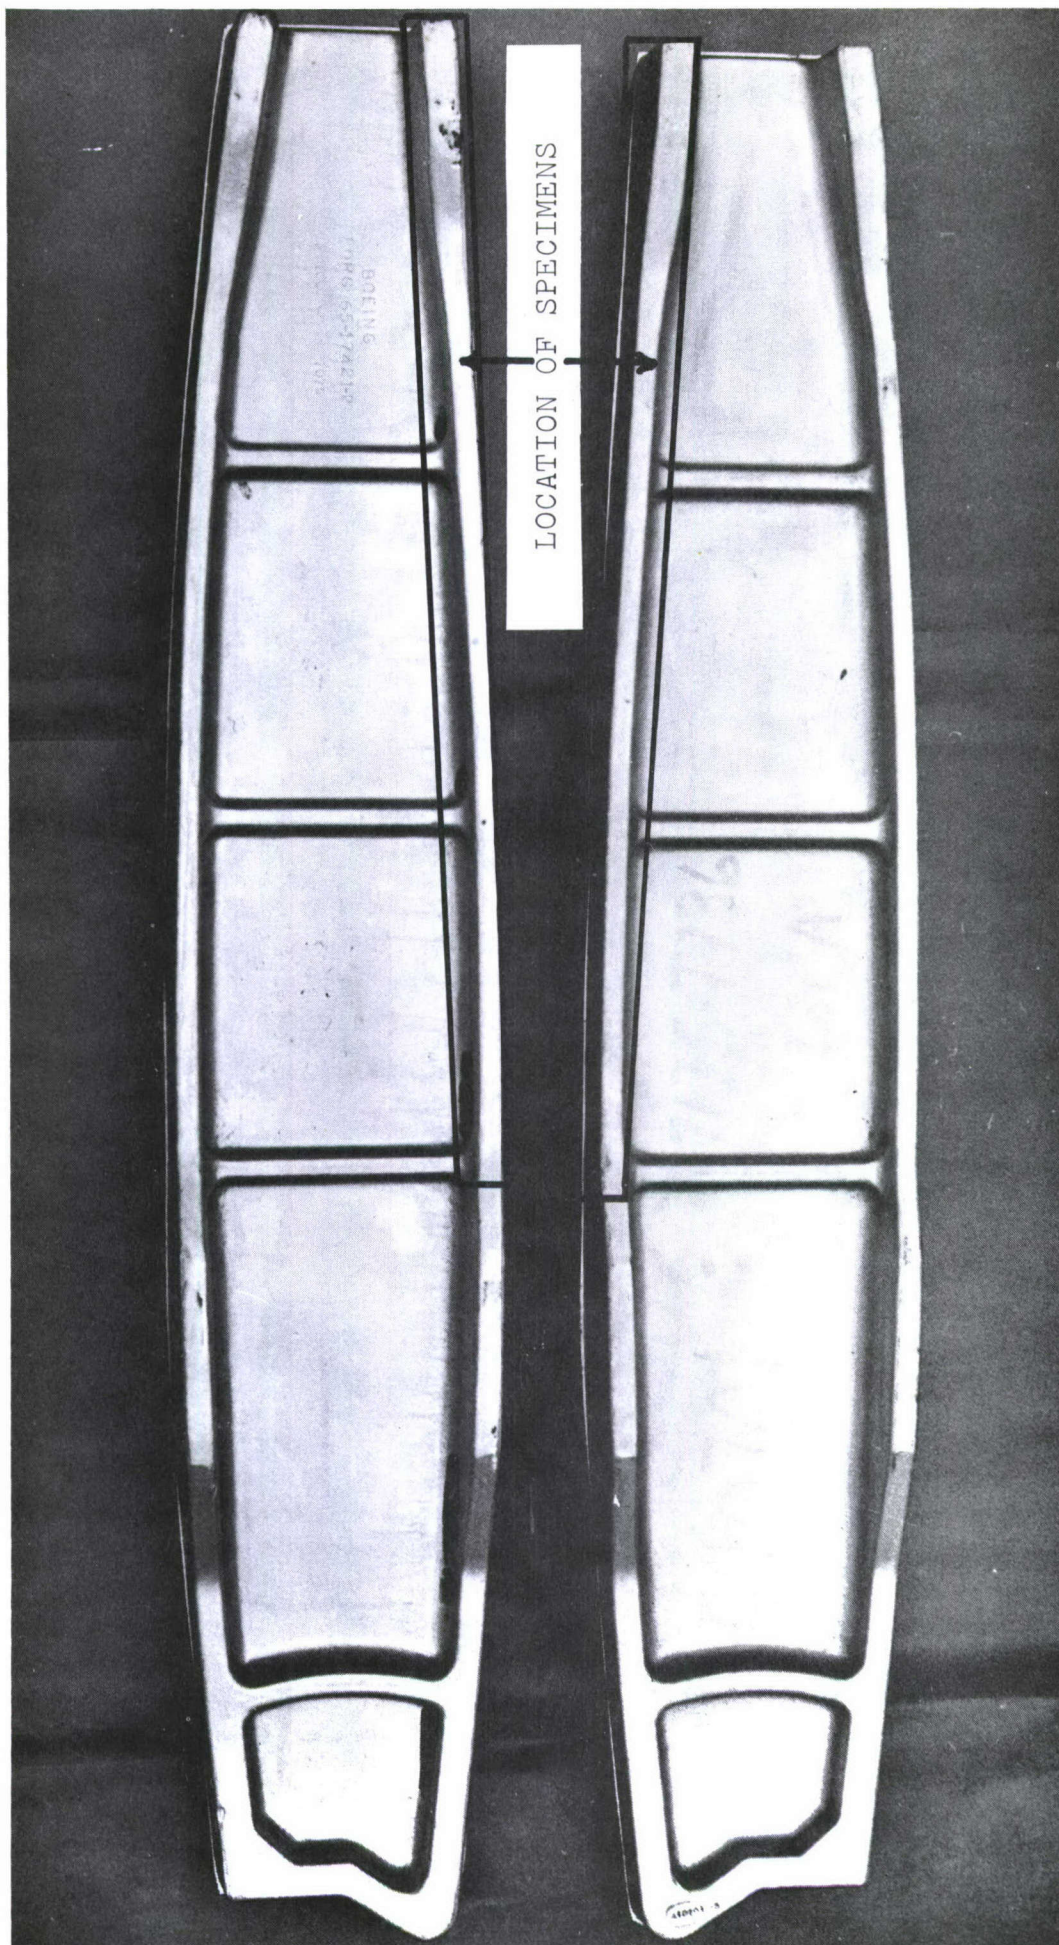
7049-T73 AND 7175-T736 DIE FORGING
